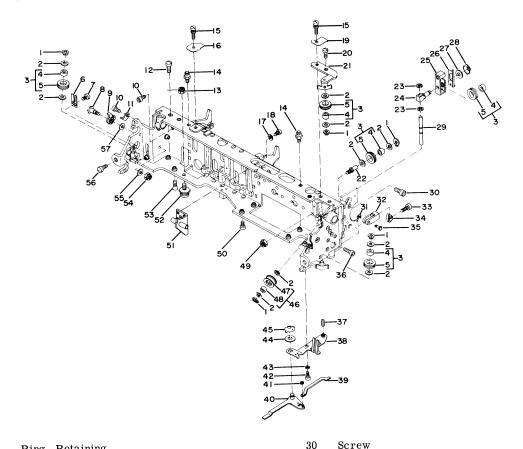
Mark and Space Clutch Release Shaft, Timing Cam Shaft, and Backstop Shaft Assembly SL-4-03315B Figure 20
